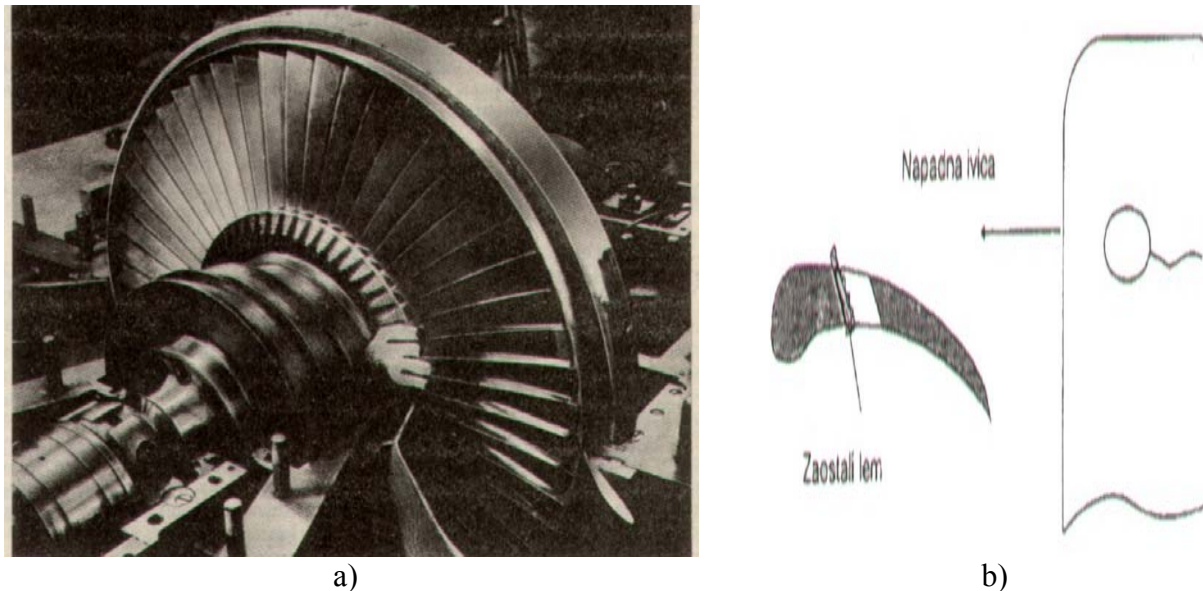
View of turbine rotor with blades in maintenance repair a) and cross-section of a blade b)
